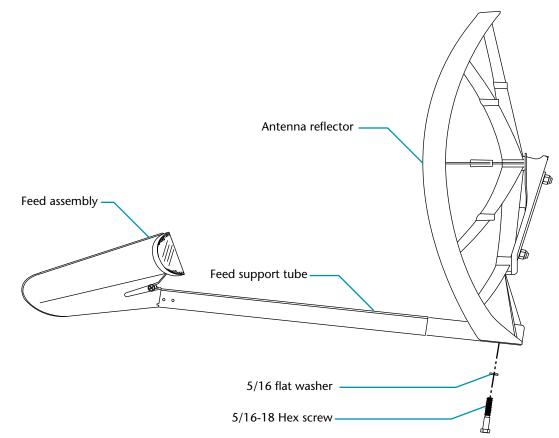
Installing feed assembly and feed support tube onto antenna reflector
